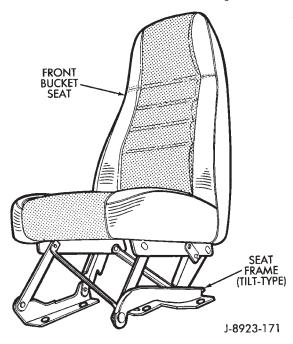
Passenger-Side Bucket Front Seat BUCKET SEATS
